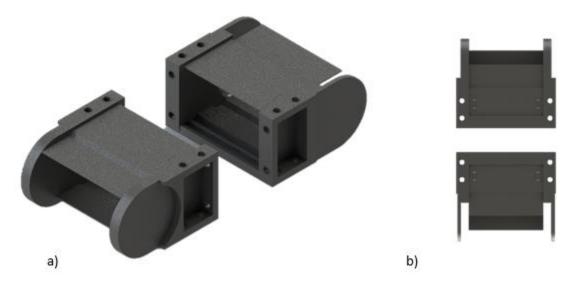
Drag chains mount to the racks: a) isometric view, b) bottom view.
